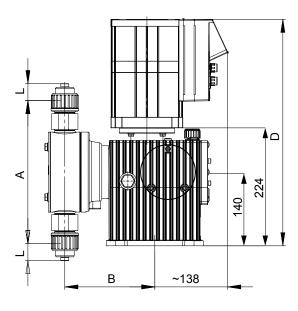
Dimensioned drawing MEMDOS LP 4 - 80, 150
